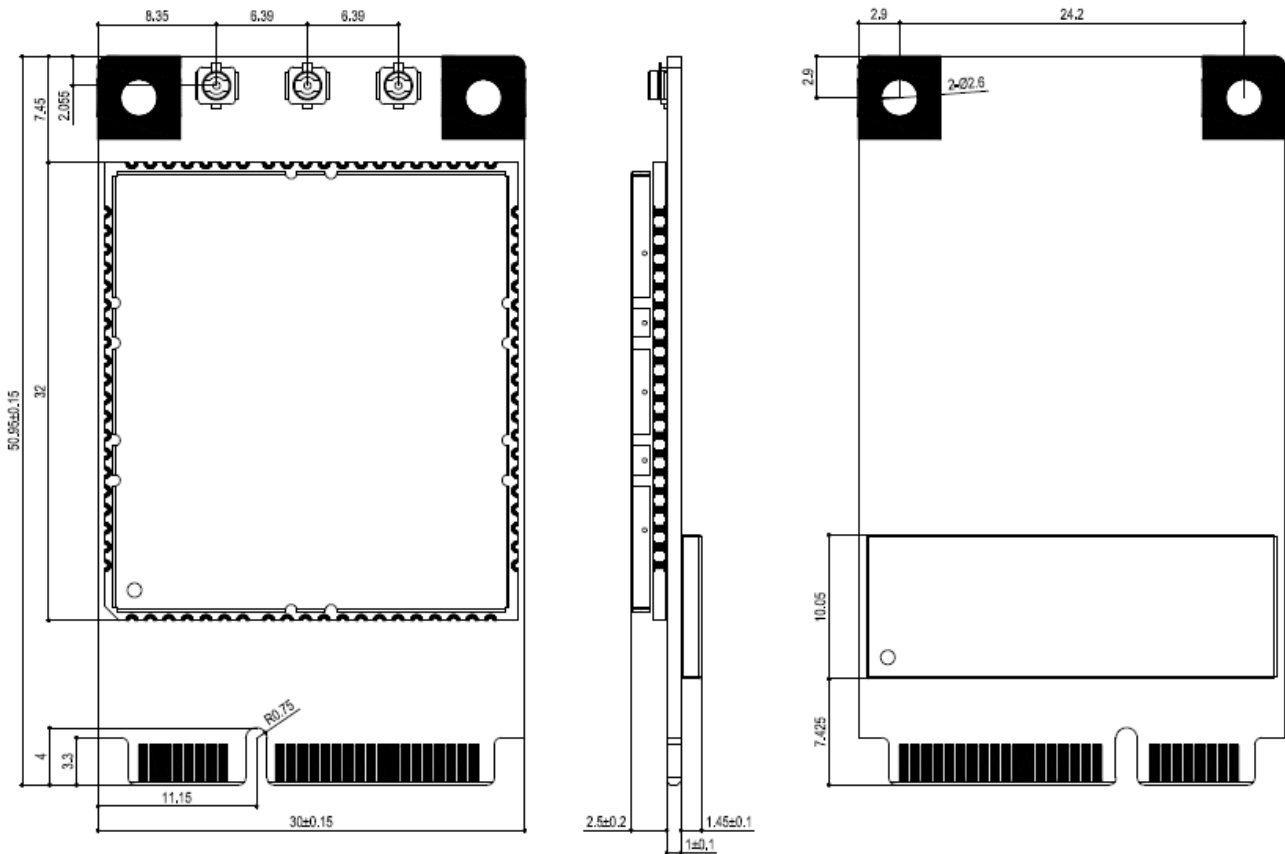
Mechanical Dimensions of EC25 Series Mini PCIe
